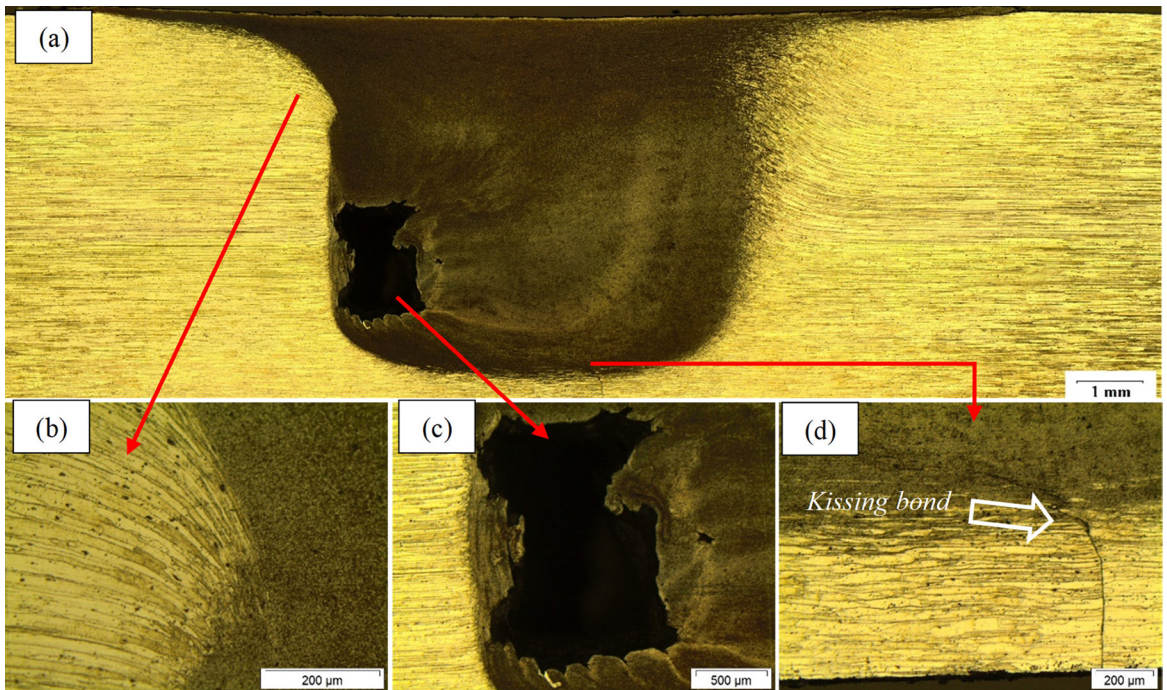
Macro and microstructure of the welded joint 3: (a) Macrograph of the cross section, (b) Micrograph of the region between TMAZ and SZ on the retreating side, (c) welding defect in the SZ on the retreating side, and (d) kissing bond welding defect.
